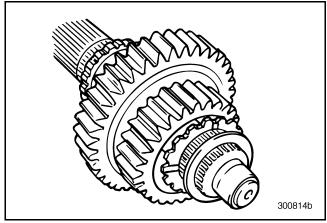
Removing Internal- and External-Toothed Thrust Washers at Fourth Speed Gear
